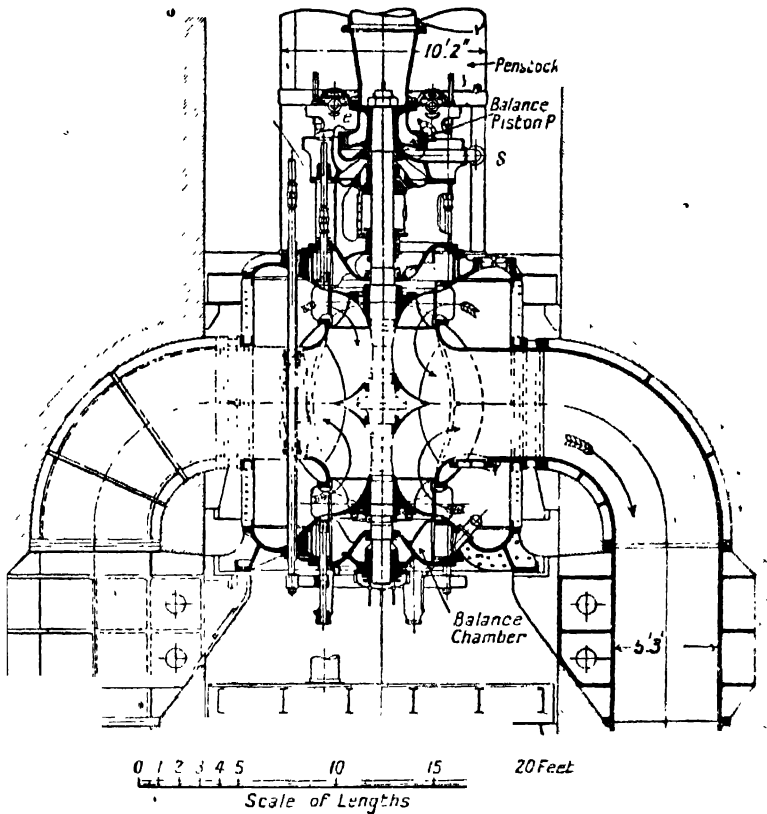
Balance Pistons for Vertical Shaft Turbine
